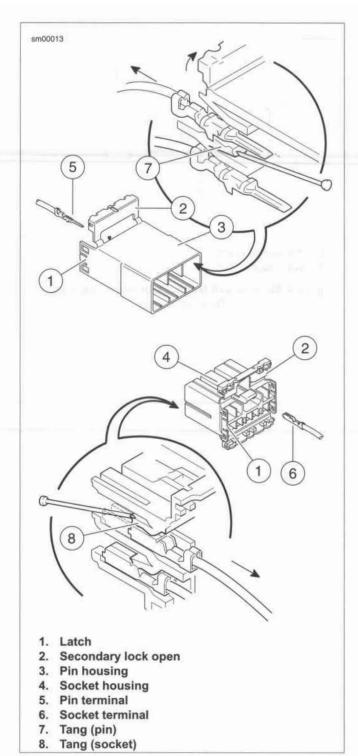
Tyco 070 Multilock Unsealed Connector: Socket and Pin Housings
